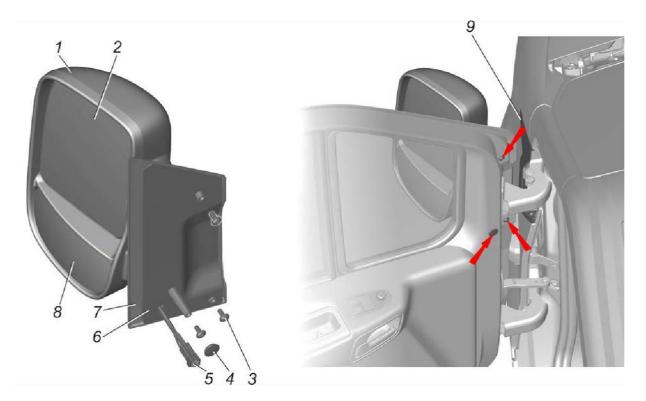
Exterior rear-view mirror with electromechanical drive: 1 – mirror housing; 2 – main mirror optical element; 3 – mirror mounting screw; 4 – plug; 5 – electrical connector (pin block); 6 – gasket; 7 – strut; 8 – auxiliary optical element; 9 – mirror molding
